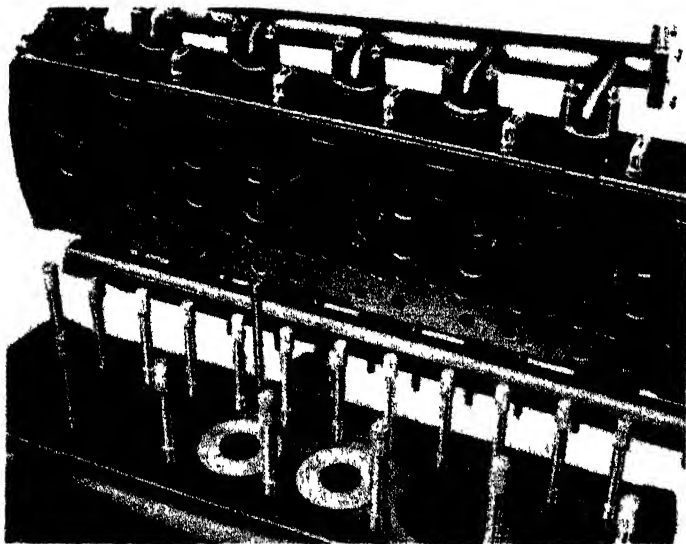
Showing Valves in Cylinder Head and two Cavity Pistons of
